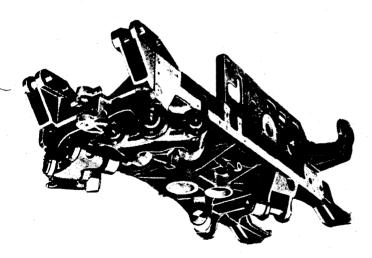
Bottom view of Revolving Frame showing Centre Gudgeon Bushing, Hook Roller Mountings and integral extending arms which carry the Rear End Casting and Power Unit.
